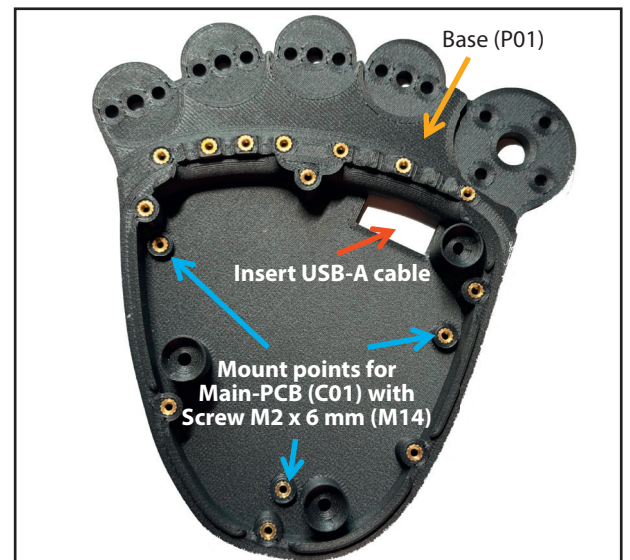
Mounting points for main PCB and USB-A cable outlet in base element.
